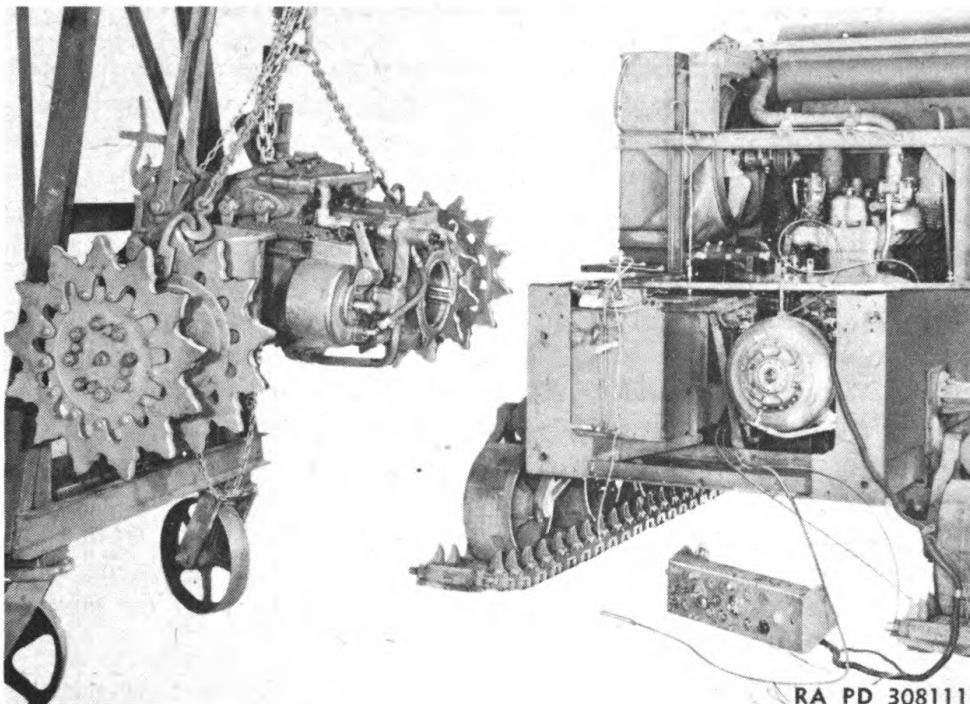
Transmission, Differential, and Final Drive Assembly Removed
